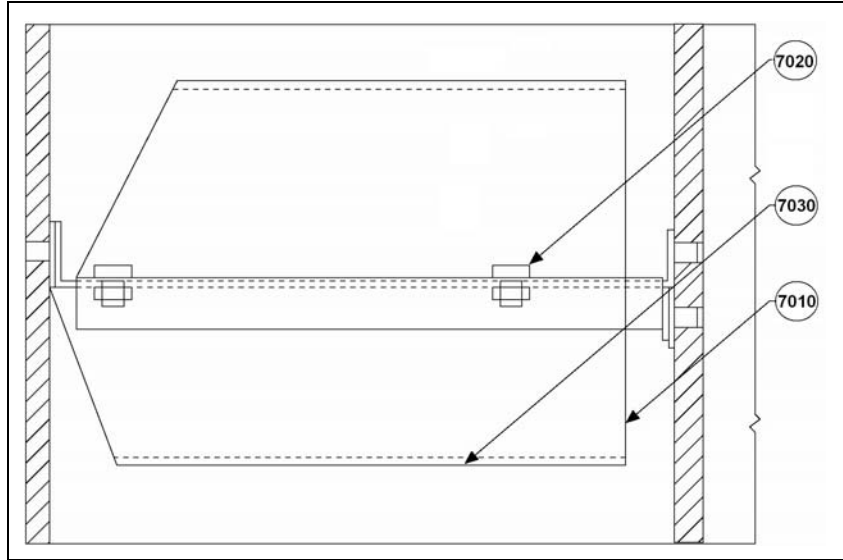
(Sheet 2 of 2). Milroyal B ECC Mounting Adapter Guard Assembly (DWG. 1022095000).
